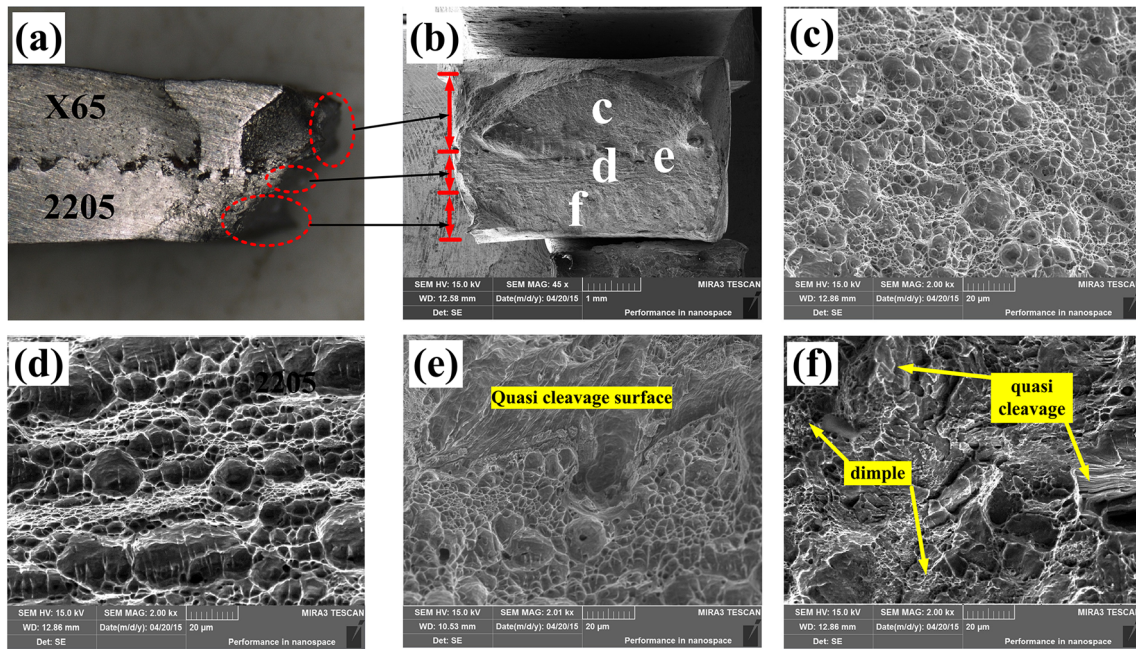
shows the macroscopic fracture morphology of the full-thickness tensile test for the LBW joint. The corresponding area in the fracture surface is shown by Fig. 16a. Figure 16c–f shows a high-resolution fractography of the positions c, d, e, and f in Fig. 15b, respectively.
